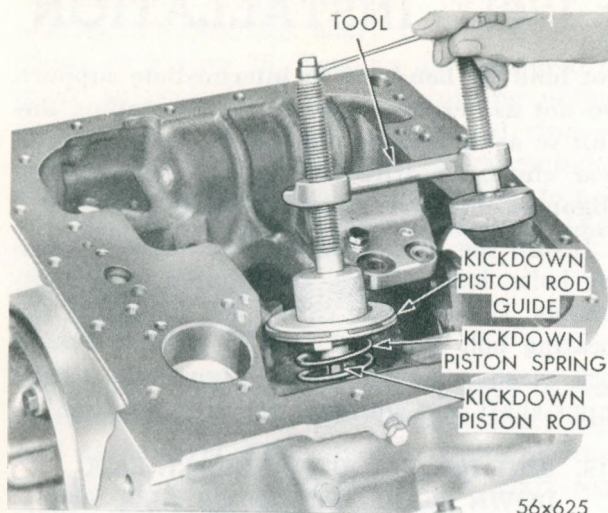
Removal and Installation of Kickdown Piston Rod Guide and Spring
